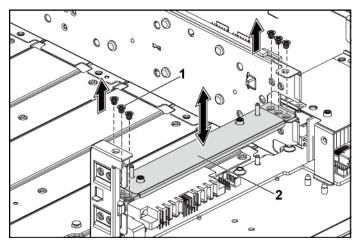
Removing and Installing the Mid-plane Holder Support
